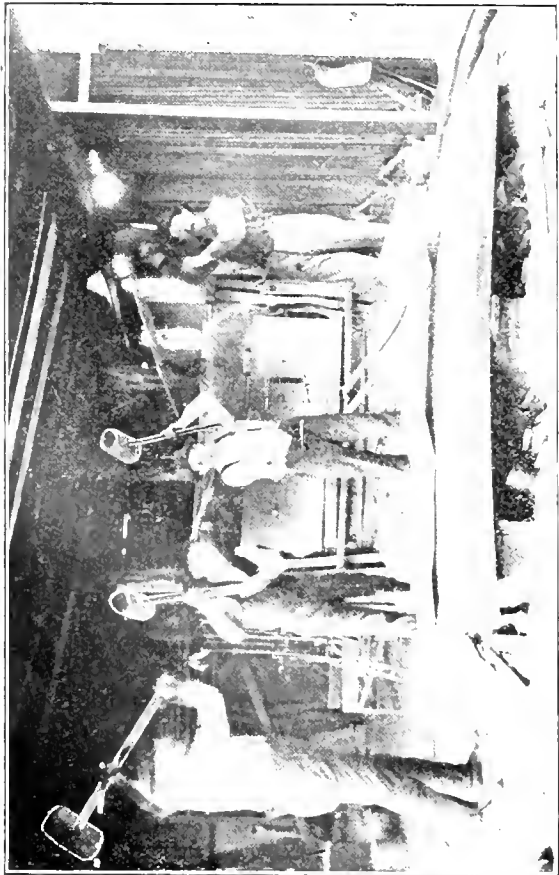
STRAIGHTENING A BENT SHEET IN THE FLANGE SHOP.
